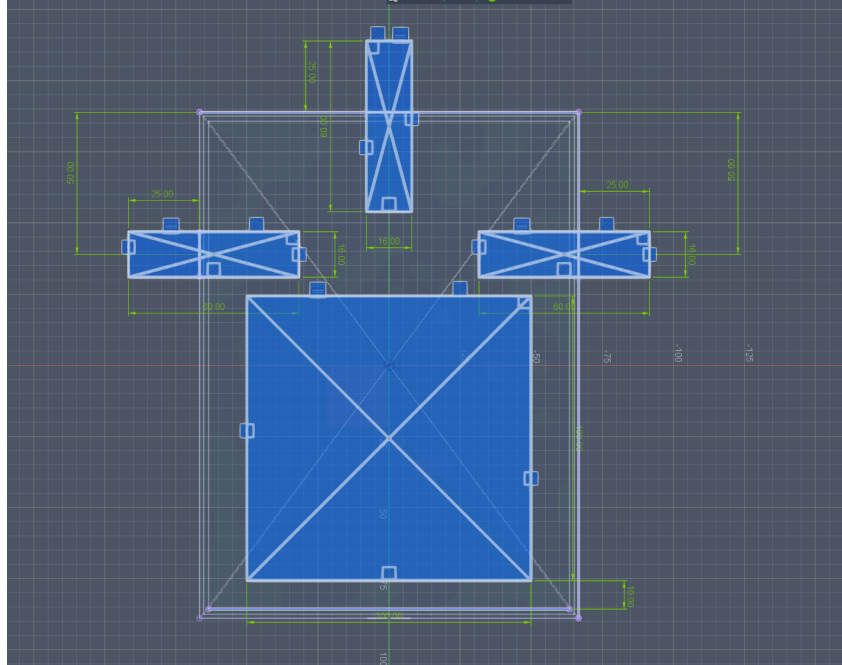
Bottom chassis component layout (Three gearmotors and the PCB).
